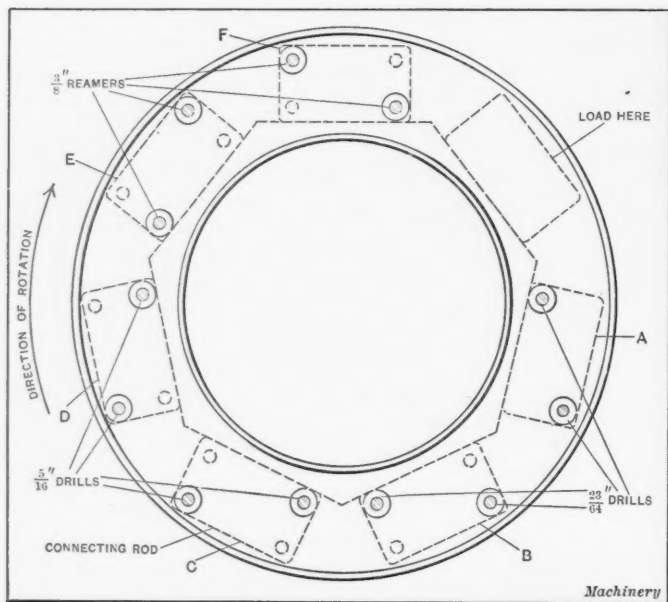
Diagrammatic View of Bushing Plate showing Arrangement of Drill and Reamer Bushings
